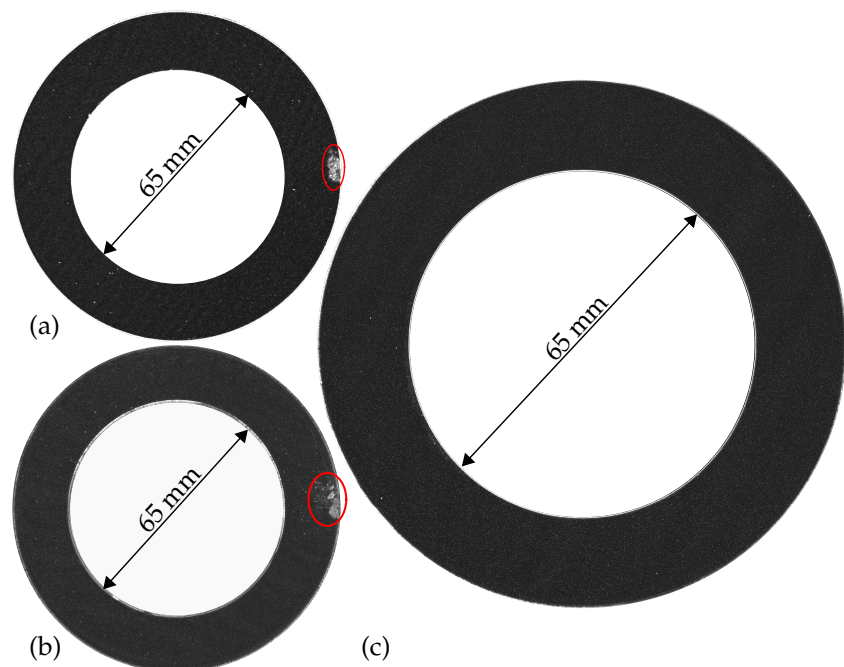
SAM measurements of semi finished parts: (a) first batch after welding and machining, (b) first batch after welding, machining and 200 h in the test rig and (c) second batch after fatigue life test with no failure.
